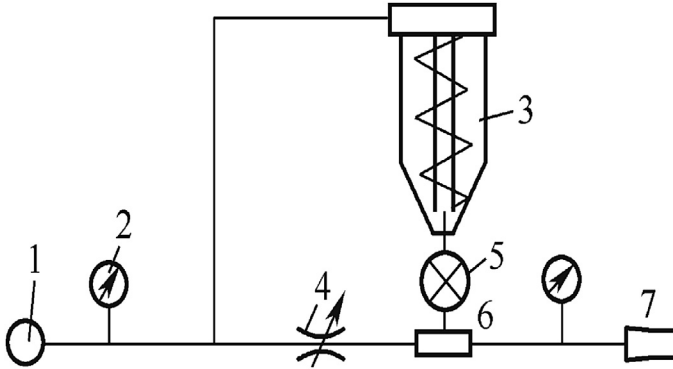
Premixed abrasive jet. 1, High-pressure pump; 2, pressure gauge; 3, abrasive tank; 4, throttle valve; 5, feed valve; 6, mixing cell; 7, nozzle.
